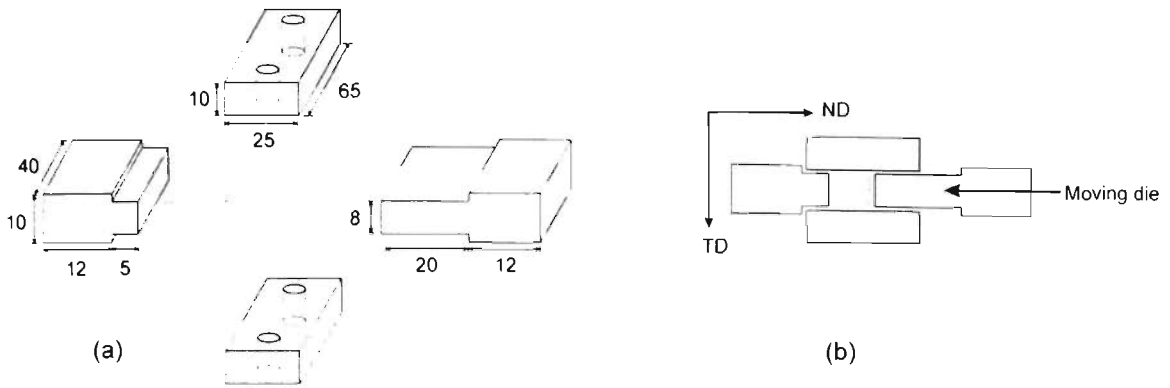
(a) Schematic illustration of disassembled die and (b) assembled view of the channel die used during hot deformation. Grey rectangle represents sample, all measurements in mm.
